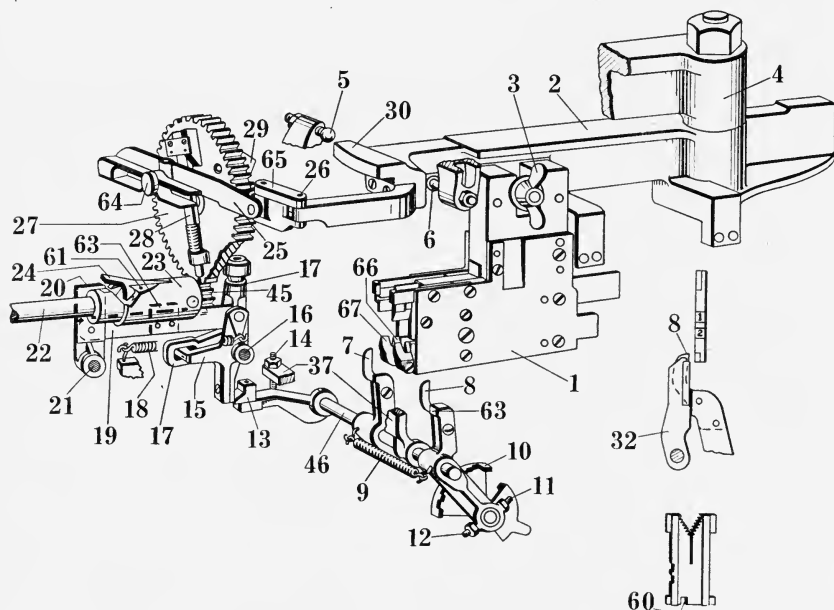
Rear View of the Mixer Distributor Box Clutch, which swings the distributor box from one distributor to the other, together with the detailed parts utilized in shifting the box.
